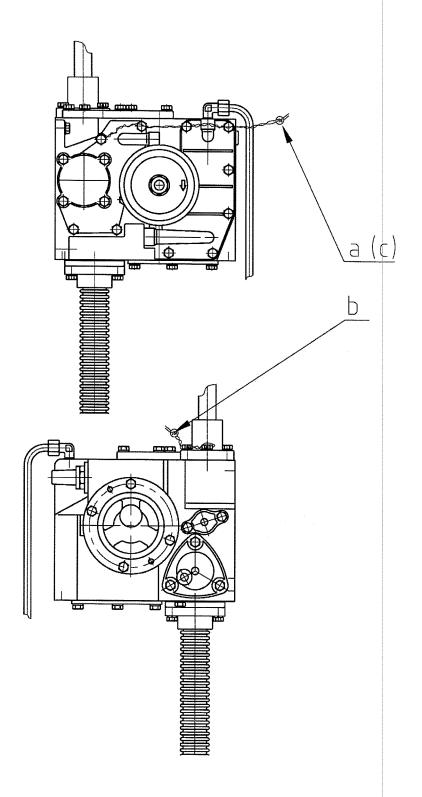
The sealing of FM-1025 measurement transducer and FP-1022 pumping unit
